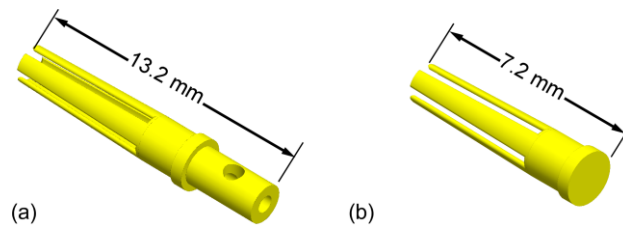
Contact used in grounding fixtures. (a) Contact at its full length. (b) Shortened contact.
